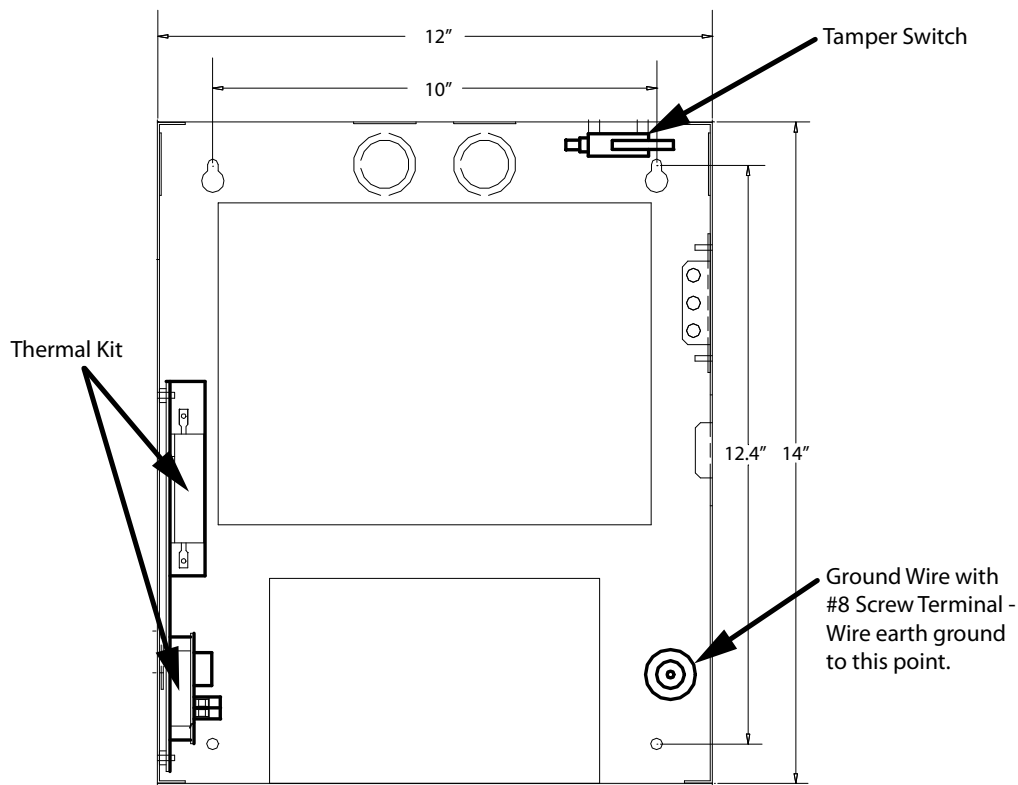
Controller Back Cover Dimensions and Optional Component Location
